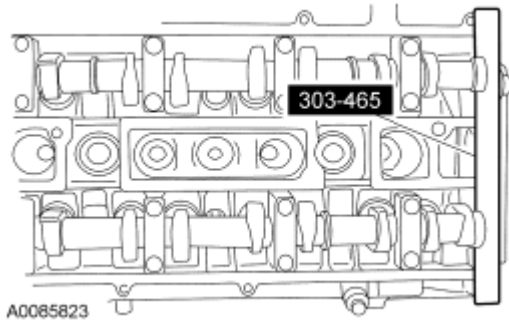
Identifying Camshaft Alignment Plate In Slots On Rear Of Both Camshafts
